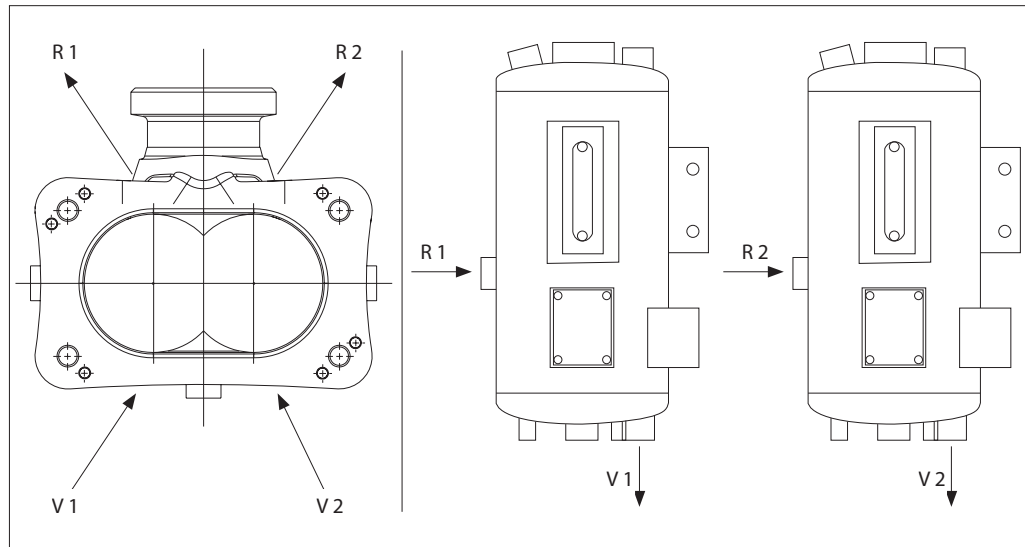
Quench medium connections for mechanical seals on the housing of the WANGEN Twin NG and seal pressure vessels (using the Chetra 6 LSK as an example). Supply connection V1 and V2 (from seal pressure vessel to mechanical seal) and return connection R1 and R2 (from mechanical seal to seal pressure vessel). The direction of the arrow indicates the correct flow direction of the quench medium. Each GRD cartridge of the WANGEN Twin NG 180 must be connected to its own pressure vessel.
